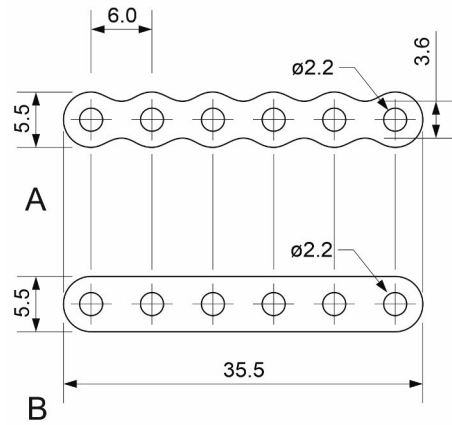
Fracture fixation plates used in Study I: design 1 (A) and design 2 (B). Dimensions in mm.
